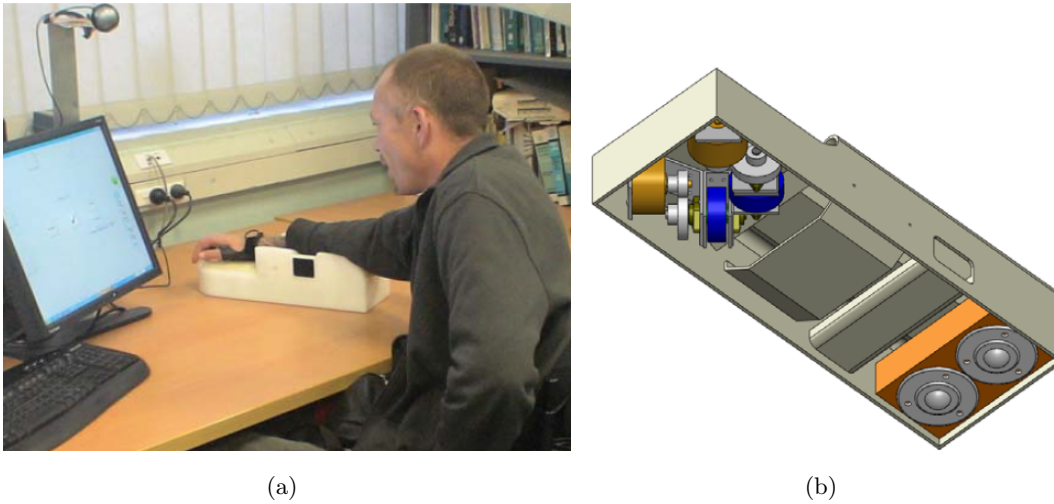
A patient using the Arm Skate (a) and Arm Skate CAD model bottom view (b).
